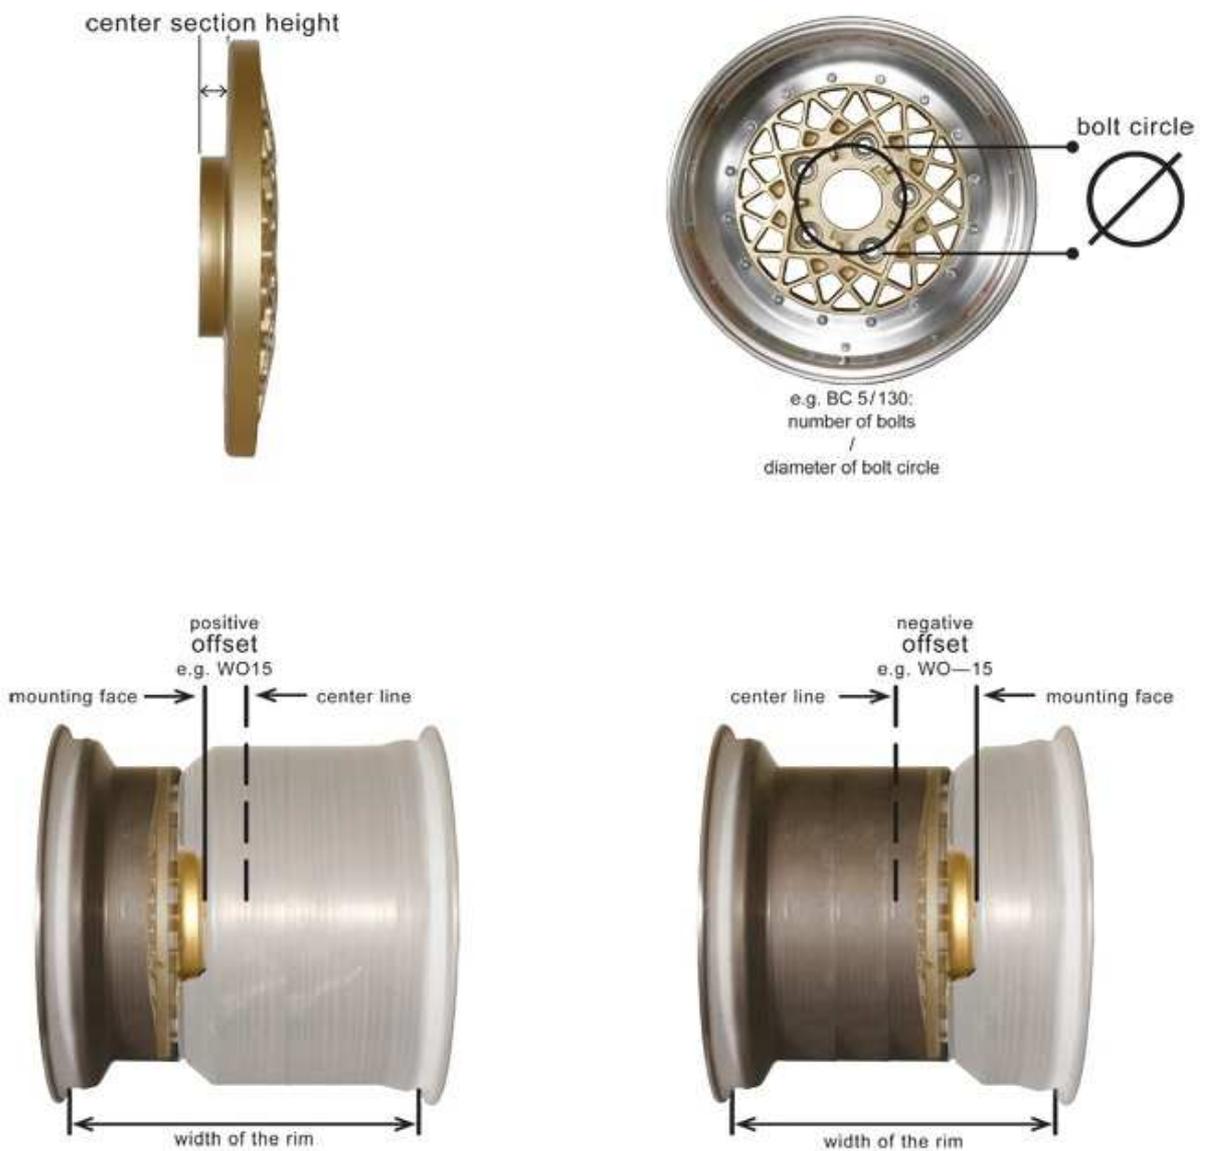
BBS racing wheel – the centre section, offset and bolt circle [5]
